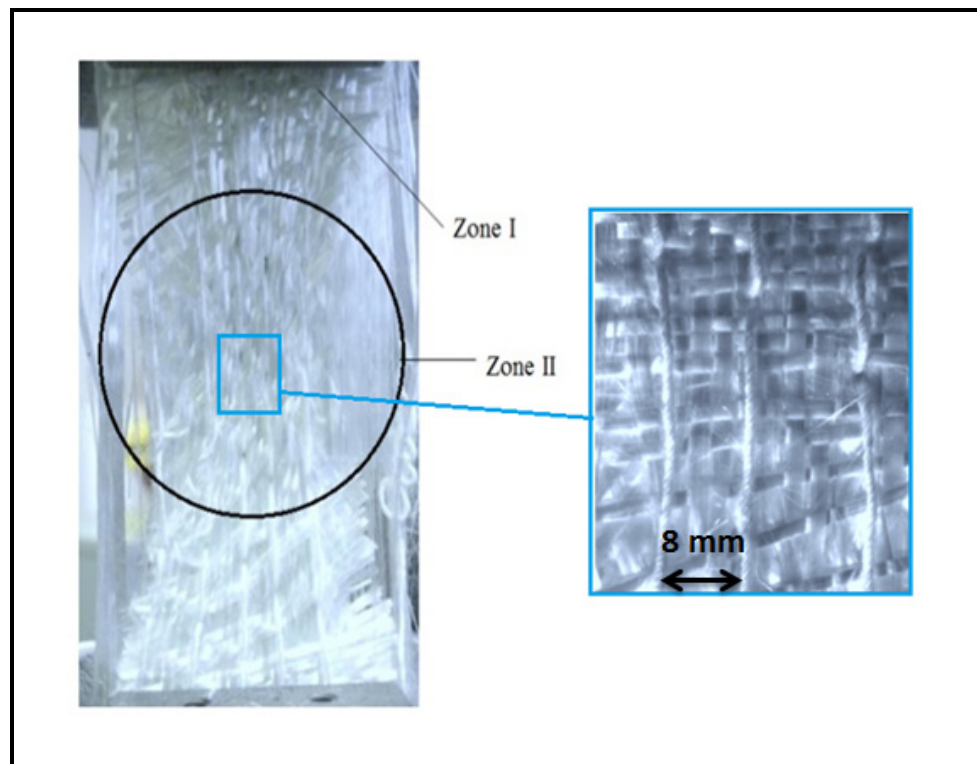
Tufted preforms loaded in tension in tufting direction
